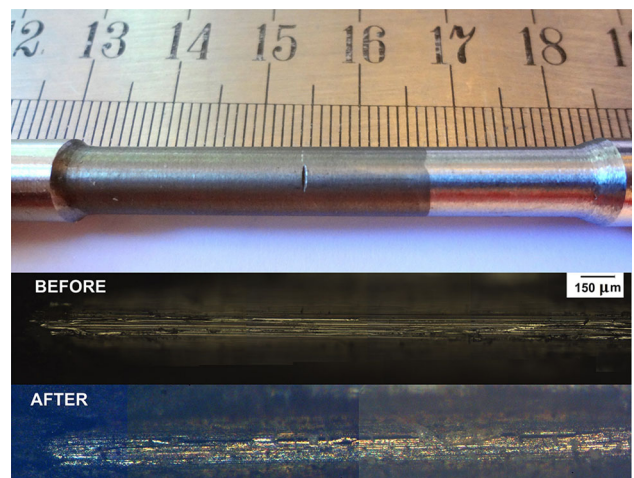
Machined notch and fatigue crack growth on steel sample
